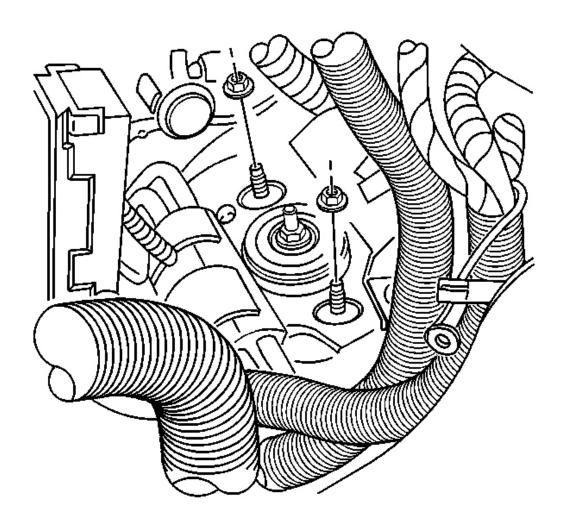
Removing/Installing Shock Module Retaining Nuts Courtesy of GENERAL MOTORS CORP.
